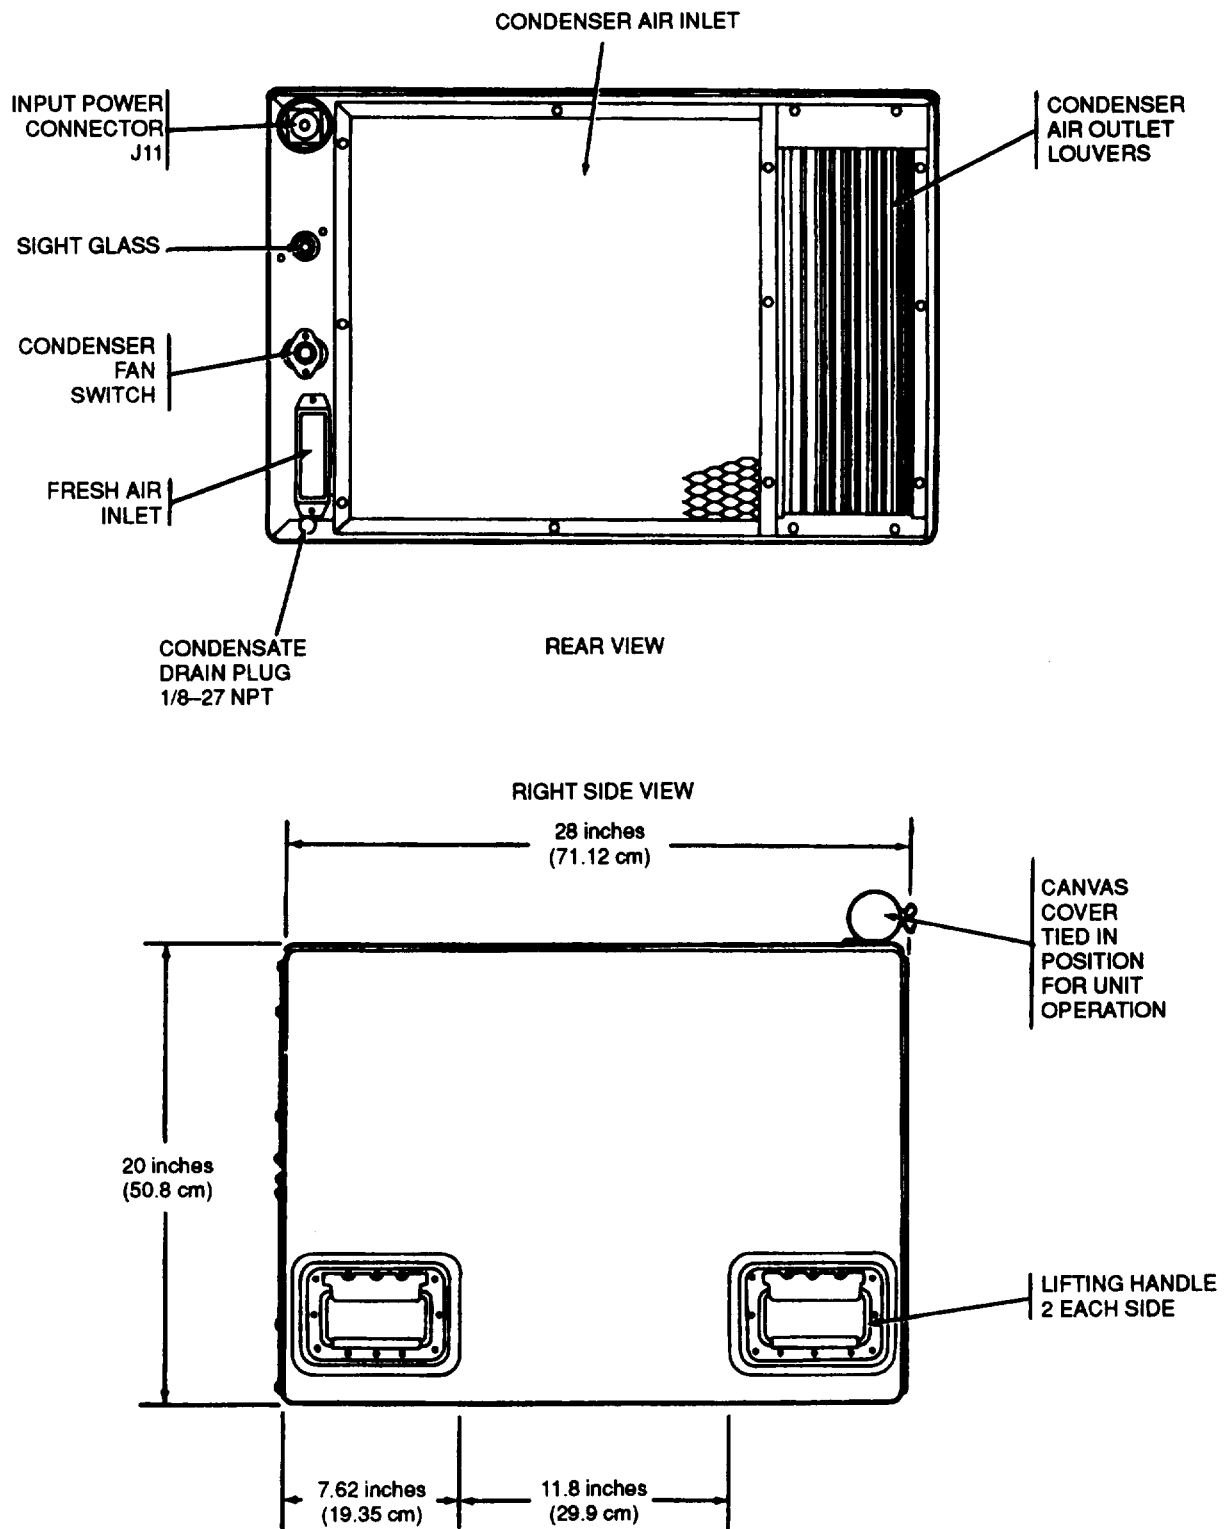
Installation Dimensions (Sheet 2 of 2)
